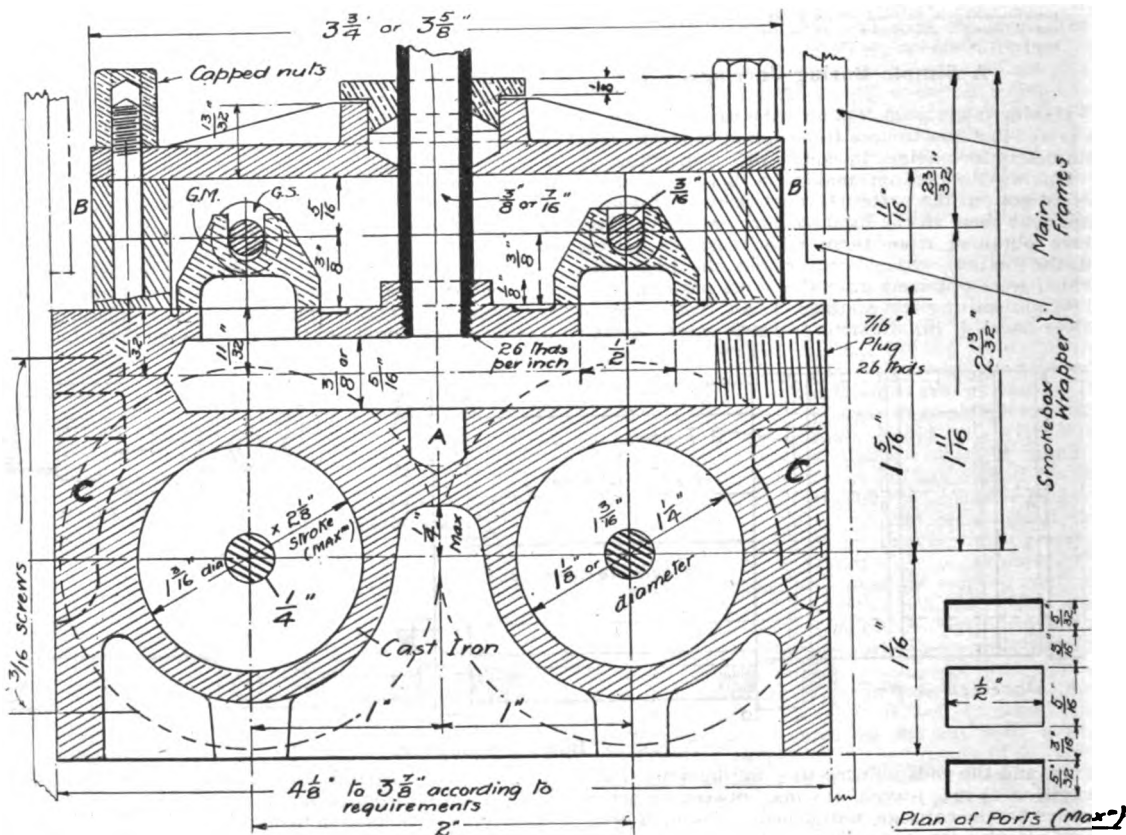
CROSS-SECTION OF STANDARD INSIDE CYLINDERS FOR 1-IN. SCALE MODEL LOCOMOTIVES.
